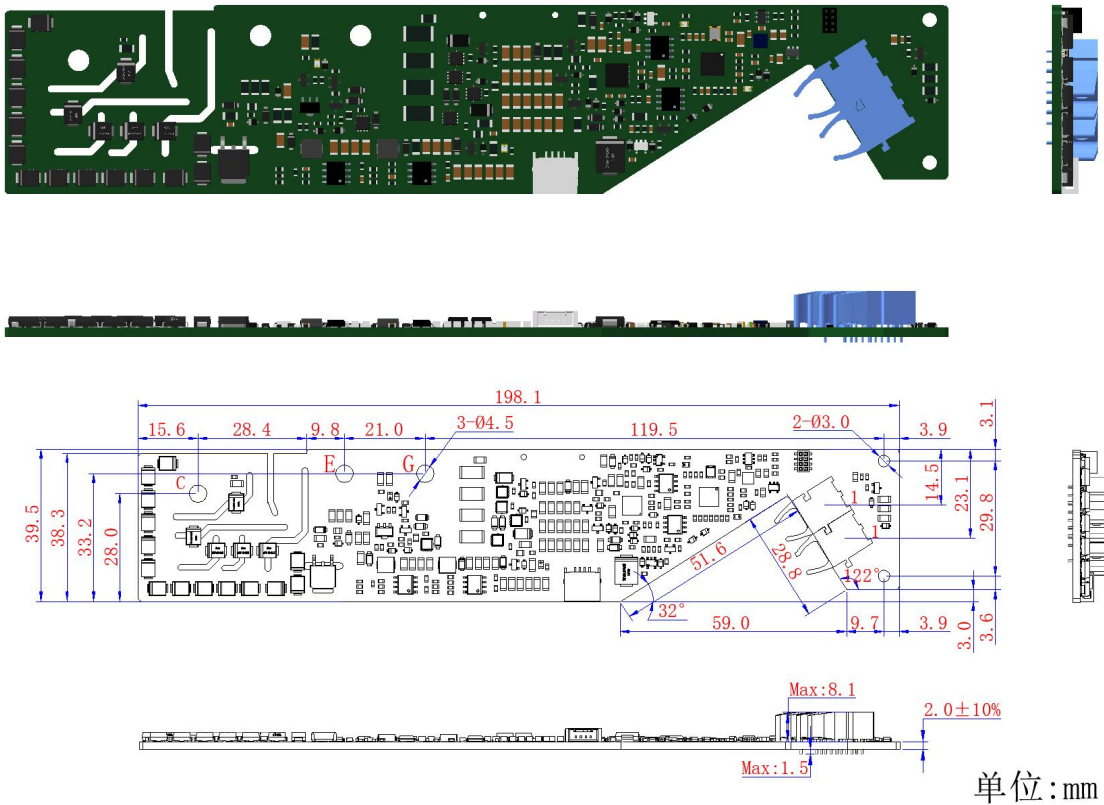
1FHD0440 3D and mechanical dimensions (unit: mm)
